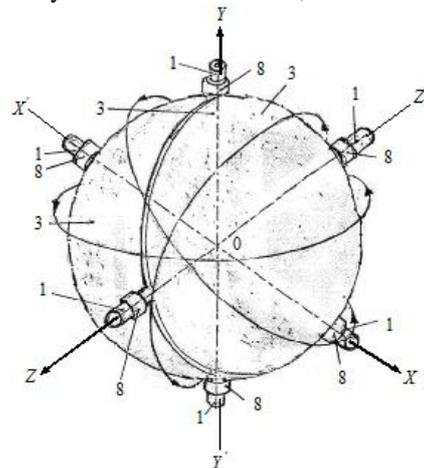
General view of the stepping motor with rotors located in the stator in the form of two hemispheres assembly
